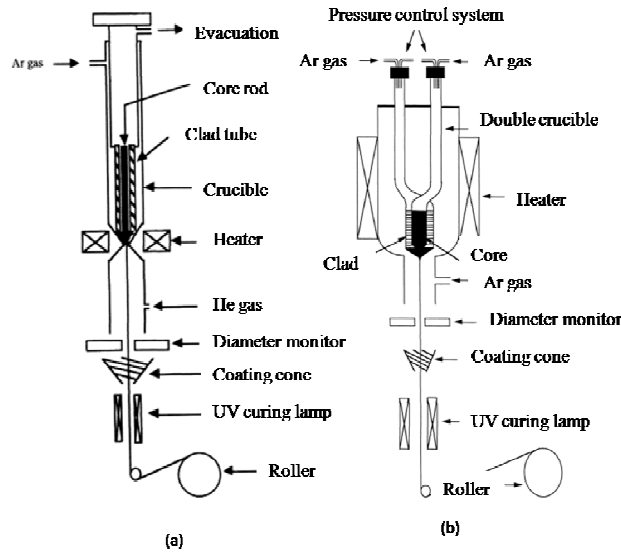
(a) Draw tower: modified crucible method and (b) double crucible drawing method.
